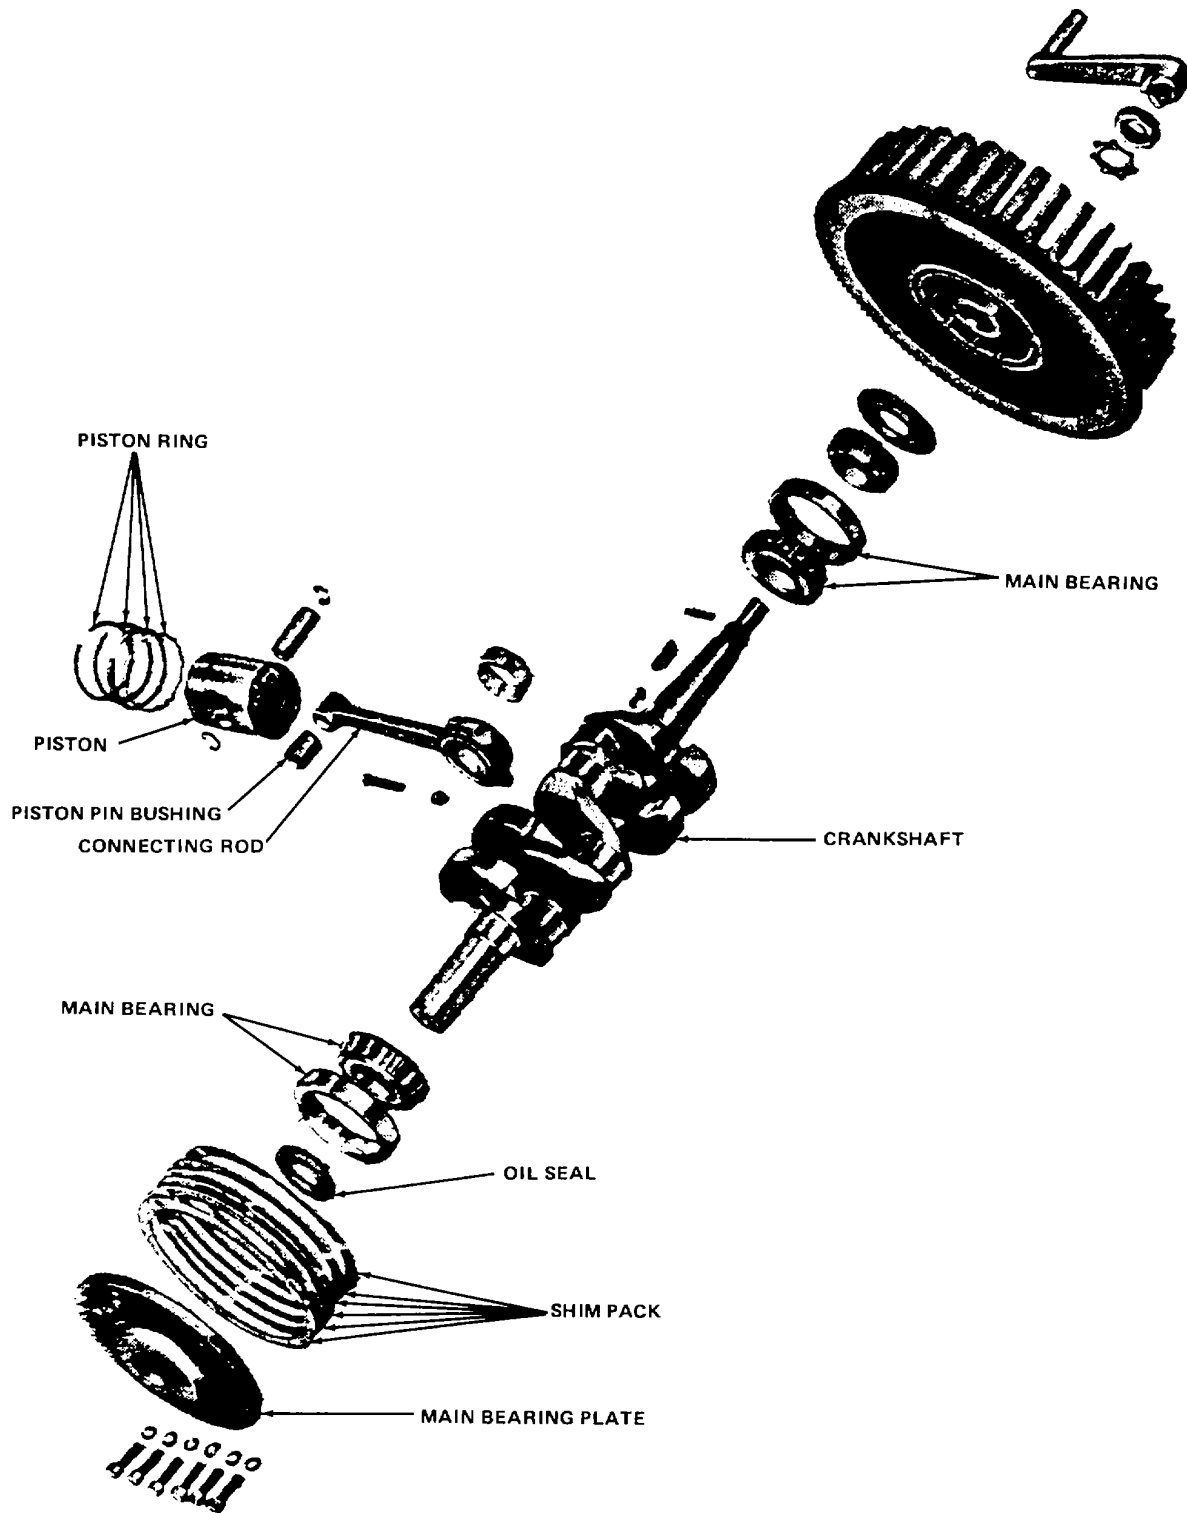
Pistons, Piston Rings, and Connecting Rods
